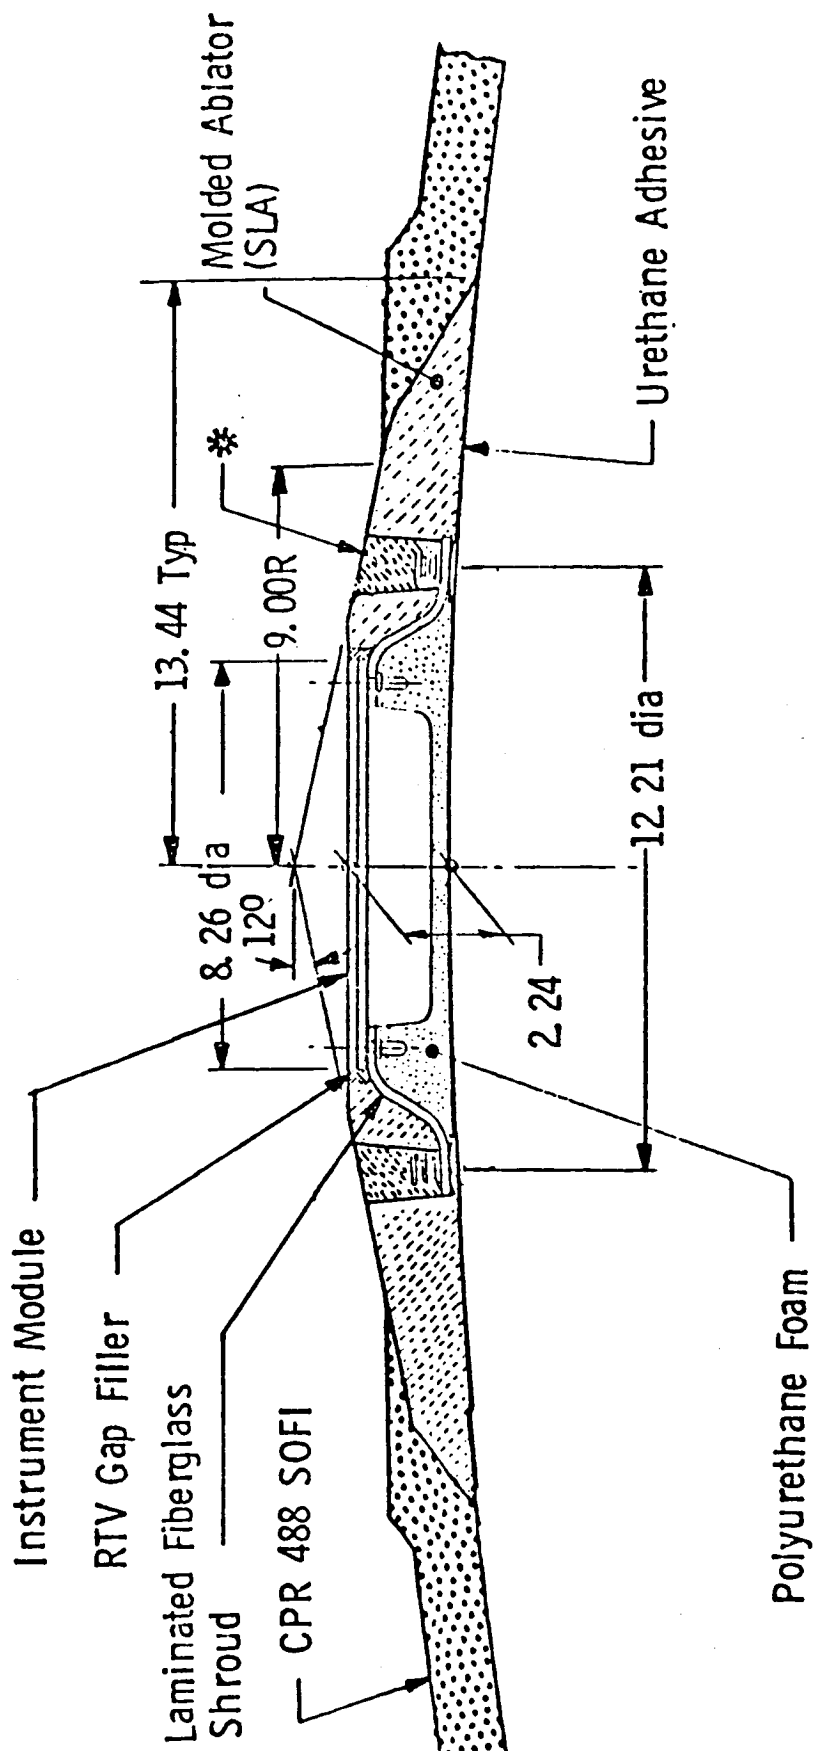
Details of ET Instrumentation Island on LO₂ & LH₂ Tank Side Wall
